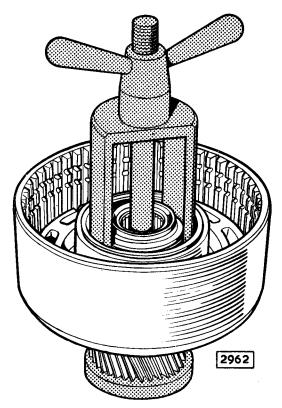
Dismantling the clutch using the special tool (Part No. CBW37A)
